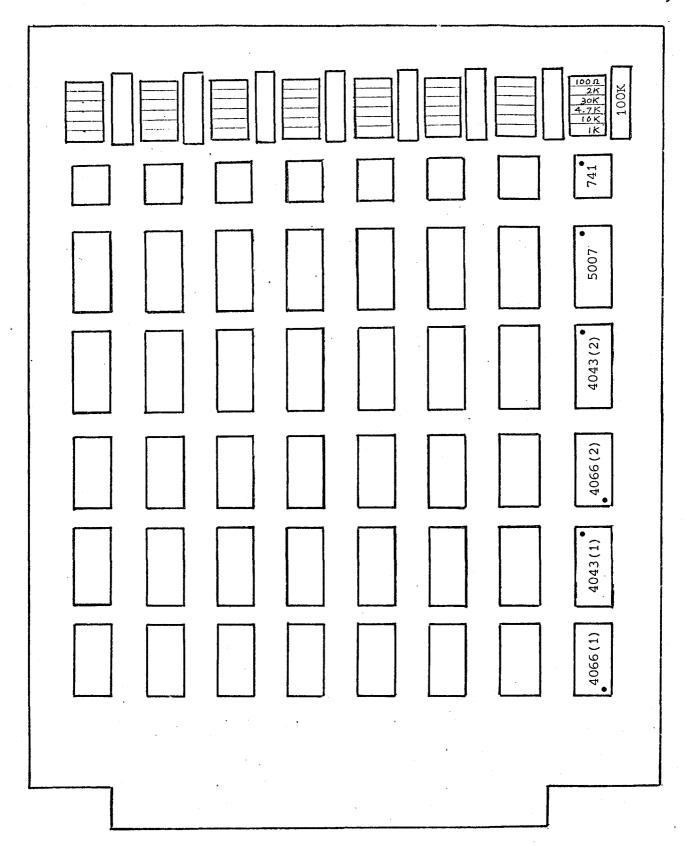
Memory board, M2 to M22; 18 boards identical. (Component side).
